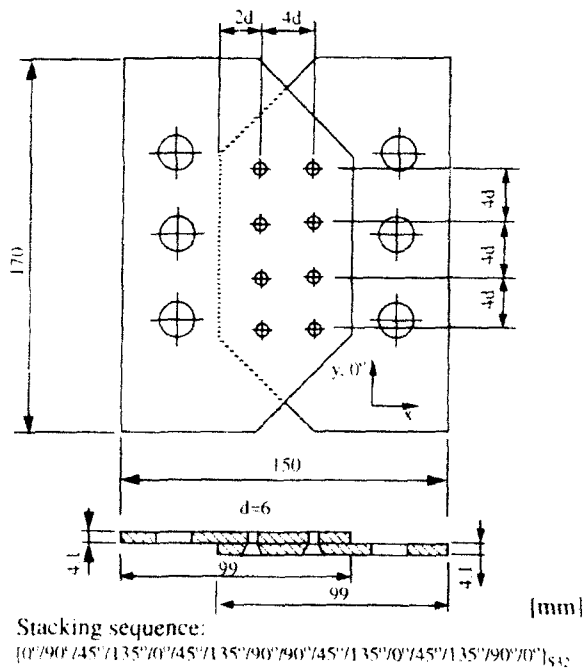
Specimen B: Shear loaded joint with two rows of fasteners.
